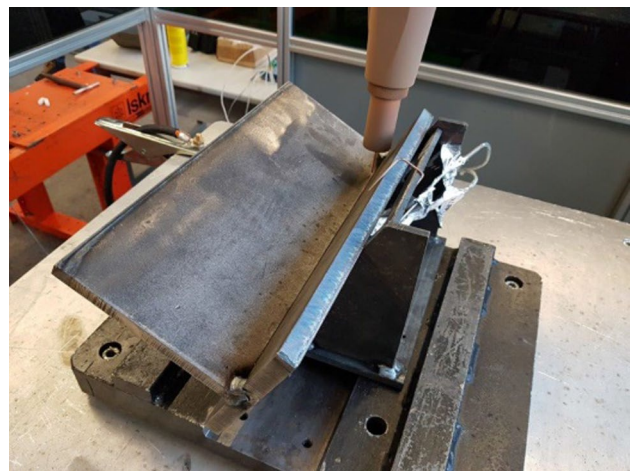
Experimental set-up of two T-joint welded plates
